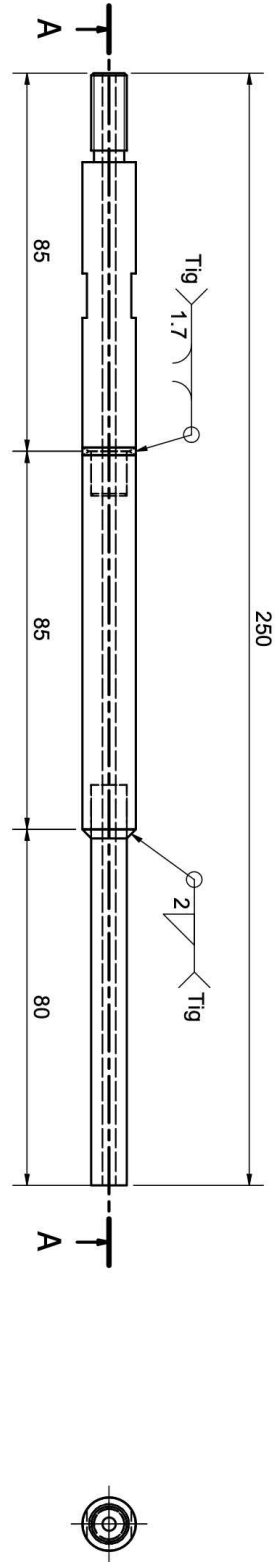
Technical Drawing of TDV6 as supplied to manufacturer.
